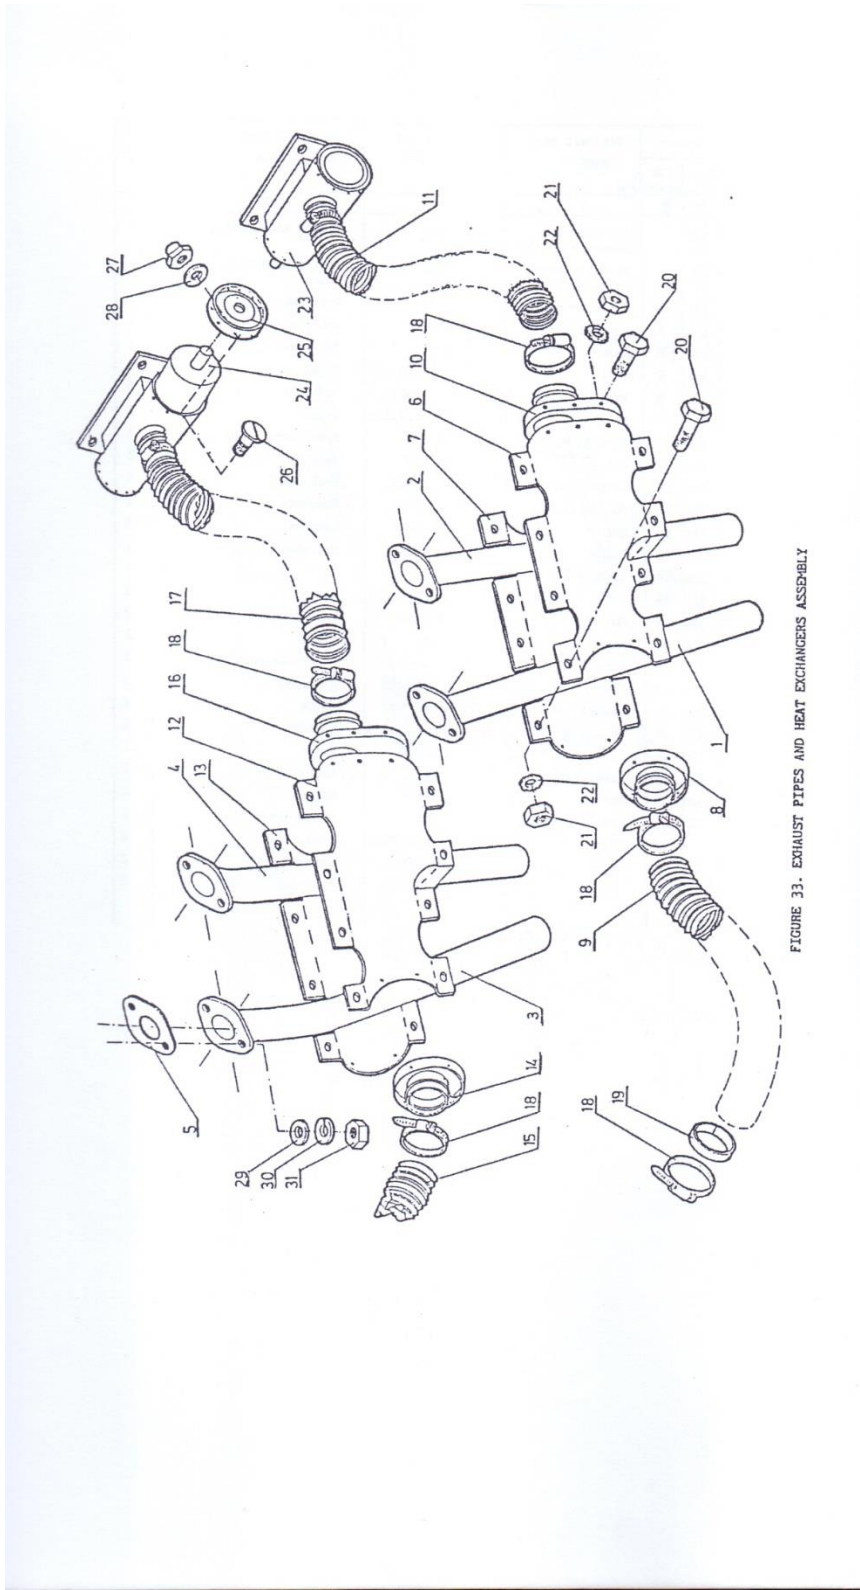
EXHAUST PIPES AND HEAT EXCHANGERS ASSEMBLY
